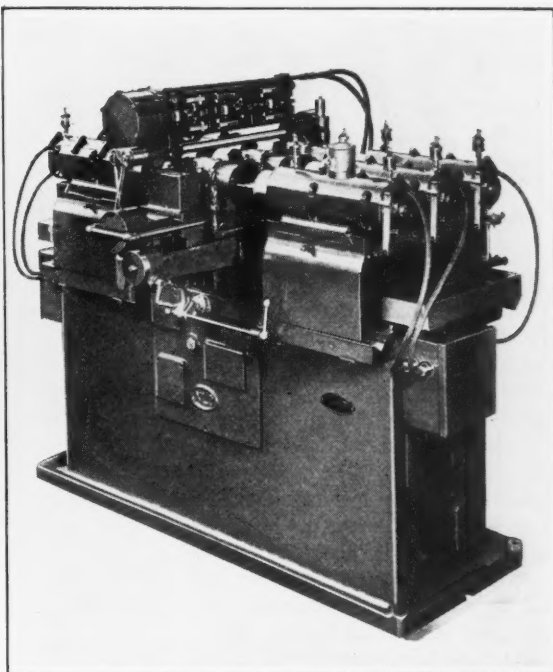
Ex-Cell-O Boring Machine Designed to Use Diamonds or Tungsten-carbide Tools
